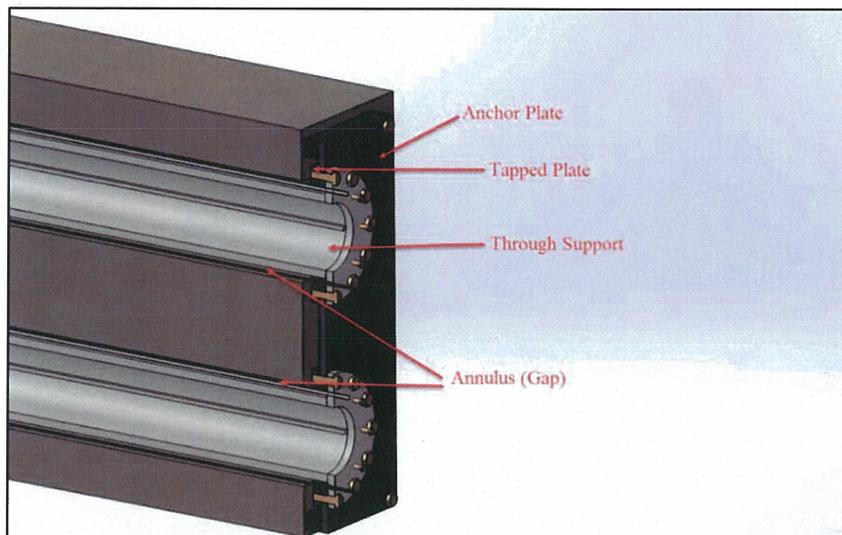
Cross Section of Through Support Tubes Attached Fixture
